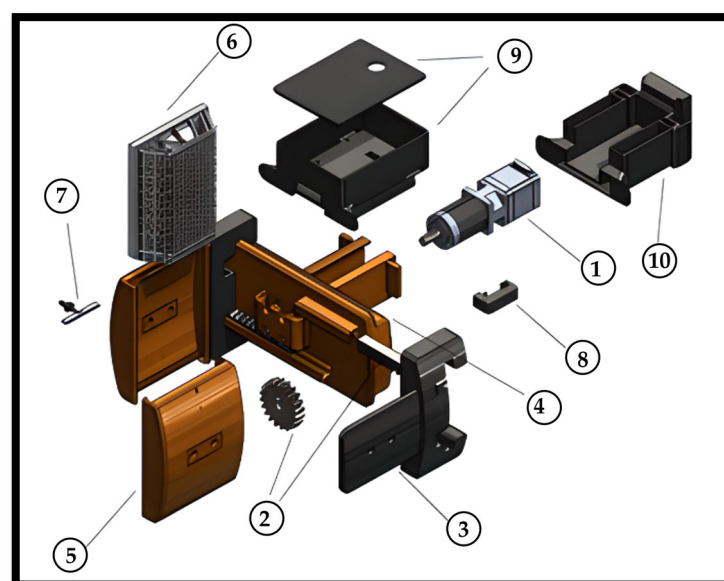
Exploded view of the mechanical components of the gripper with balloon numbering as part numbers from Table 1.
